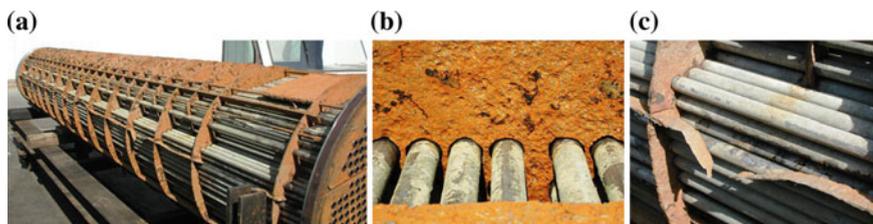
a General view of heat exchanger bundle. b, c Corroded carbon steel parts
